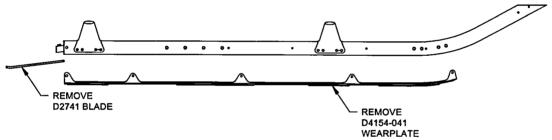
D350-636-015/-016/-017/-018 BLADE/WEARPLATE REMOVAL
